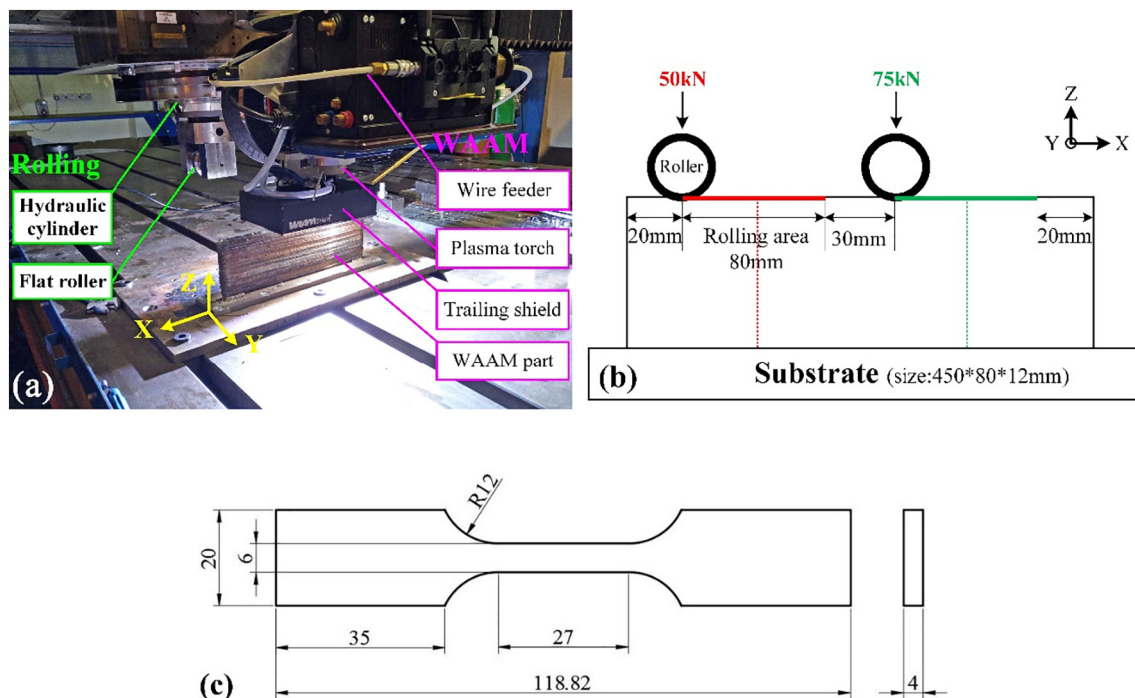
(a) Experimental setup of the in-process rolling assisted WAAM system and (b) principle of one pass rolling study (c) dimensions of the tensile specimens (note that the 27 mm is the parallel length).
